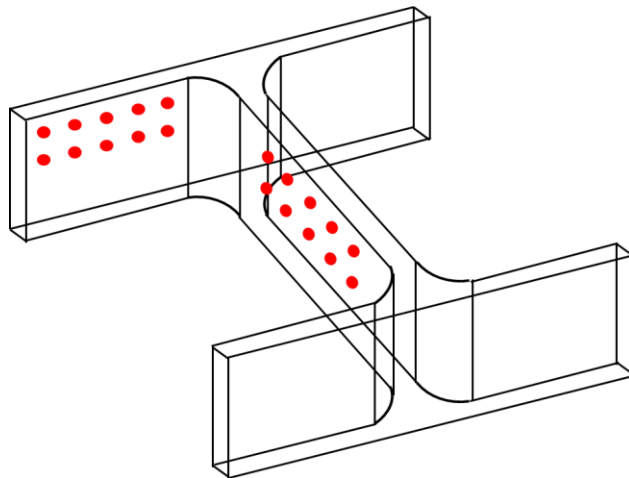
Sample locations for CMM measurements on rib and skin surfaces
